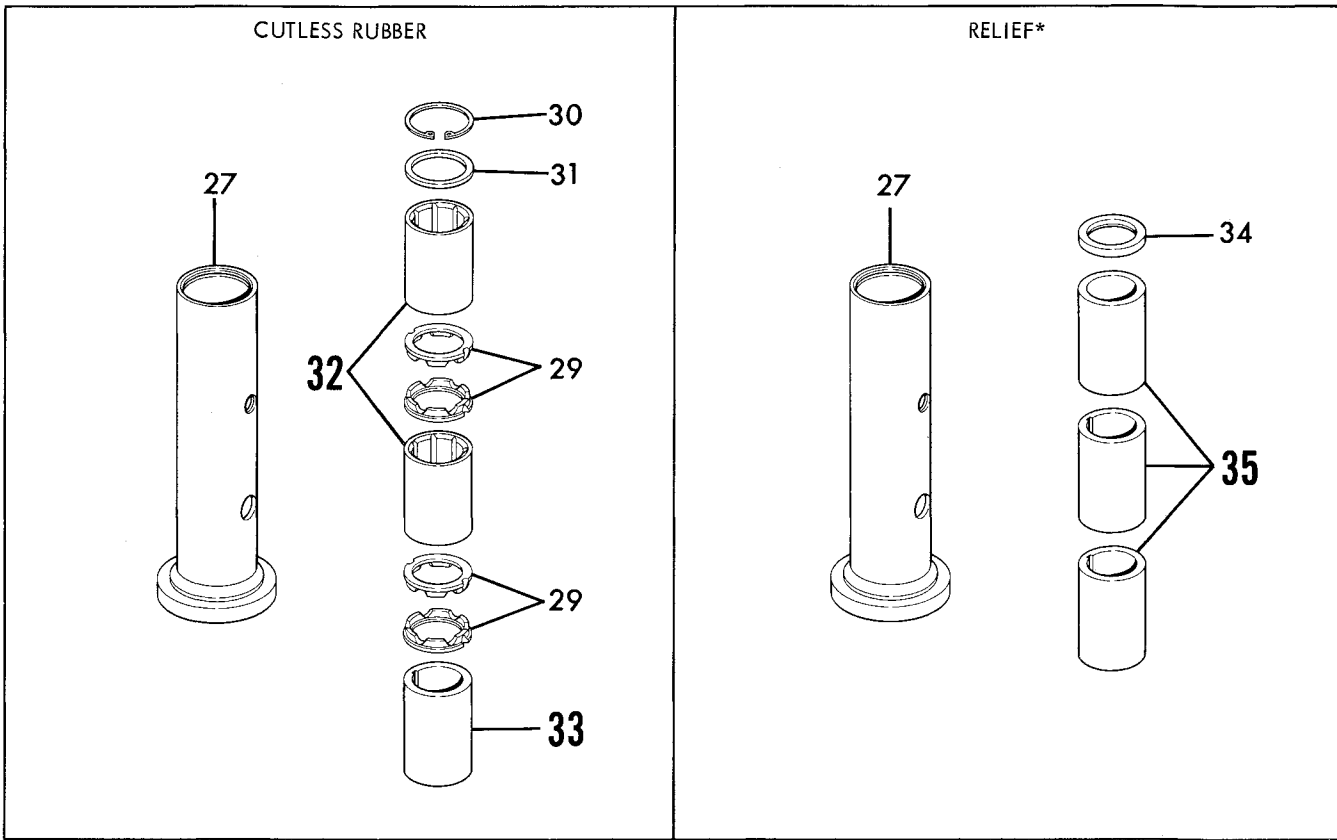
Model 641-642 Exploded View (Sheet 2 of 3)
